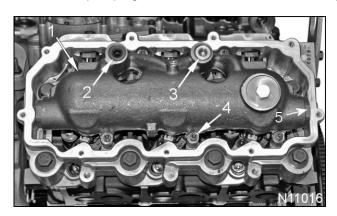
High-pressure oil rail plugs and crankcase-to-head tube assembly locations (left side shown)
